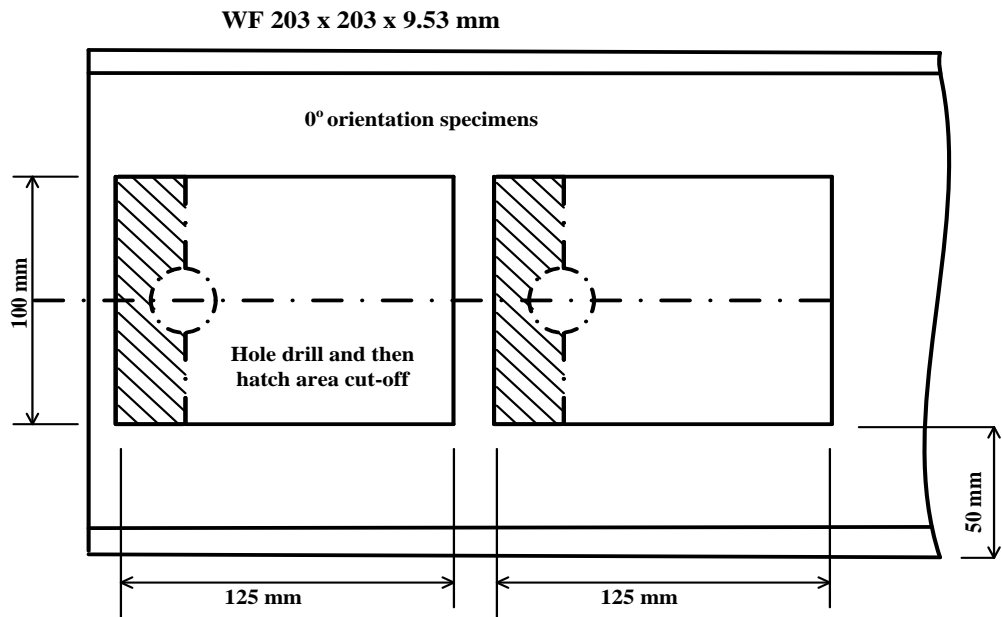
Blanks specimens and cutting pattern for the 0° specimens.
